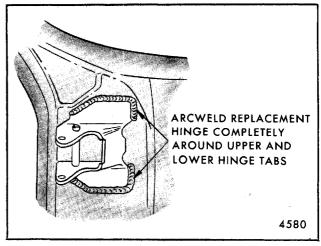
Body Side Hinge Strap Installation - X Styles Shown, H Styles Similar
